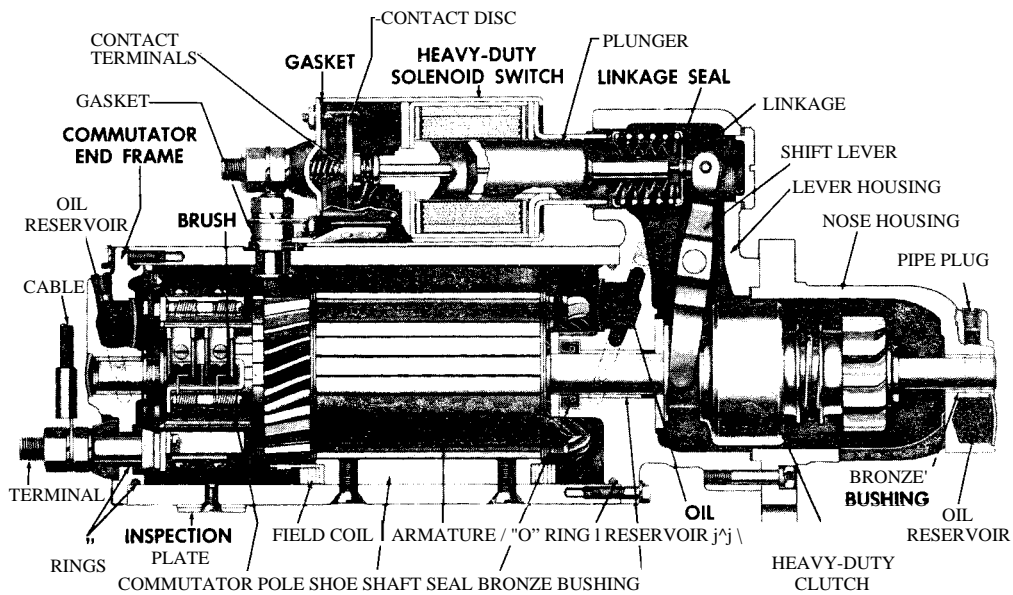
Cross-Section of Starting Motor with Heavy-Duty Drive
